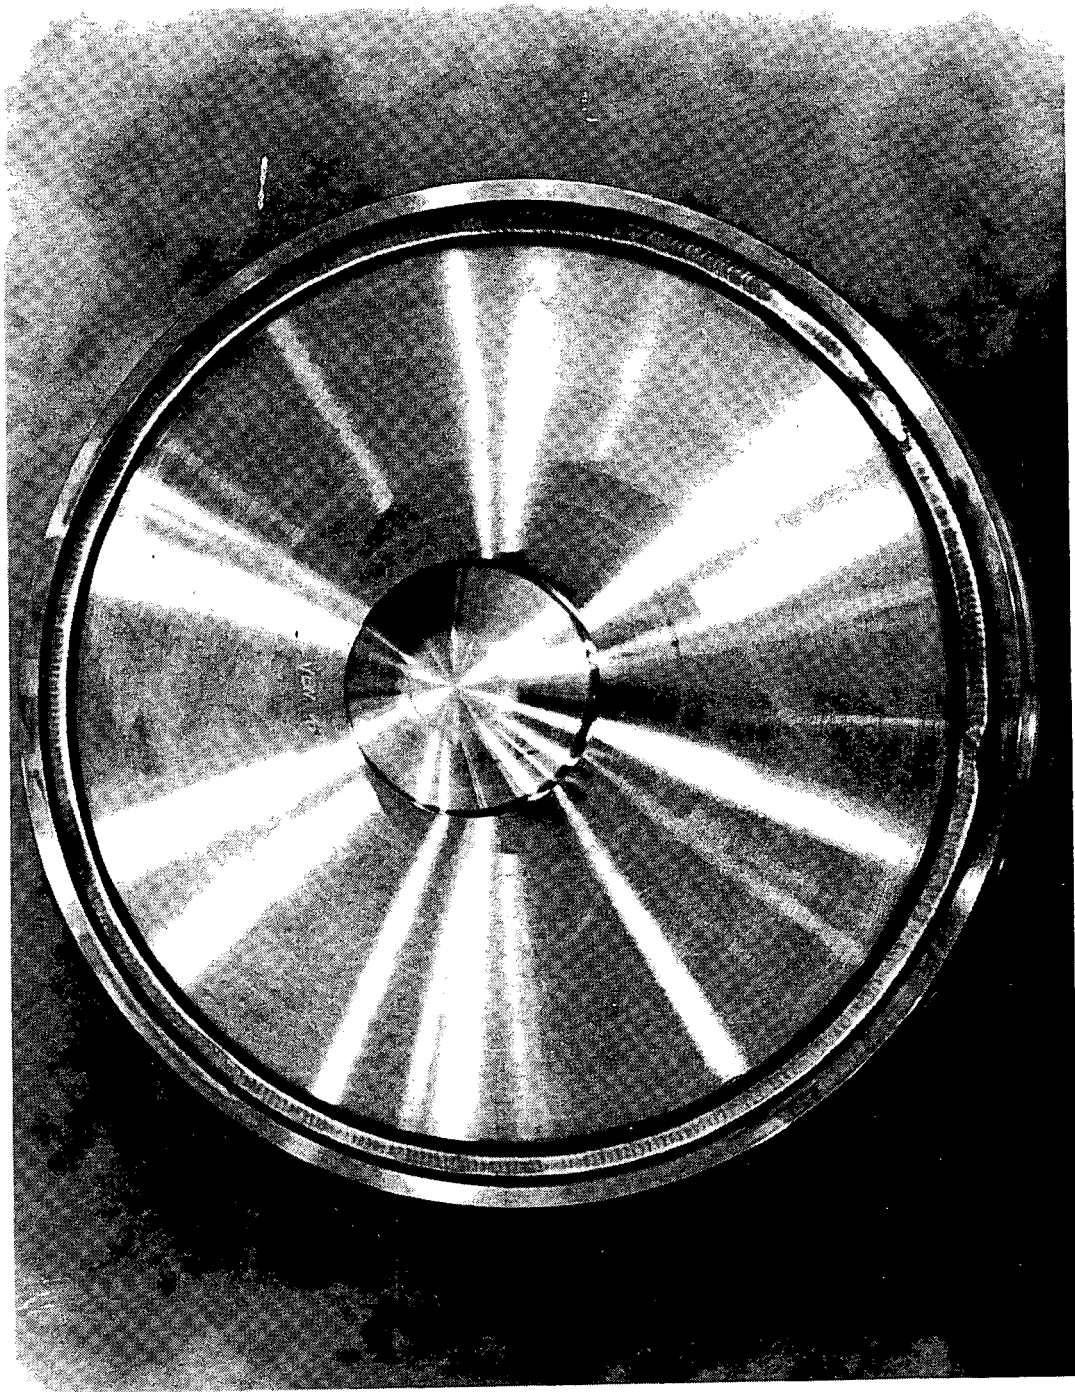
Canister Lid After Seal Weld
